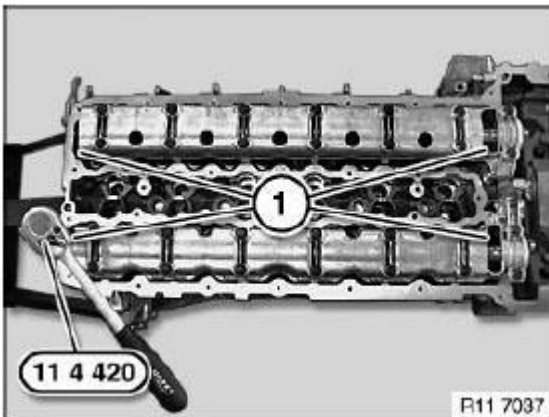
Removing M9 Cylinder Head Bolts Using Special Tool 11 4 420
